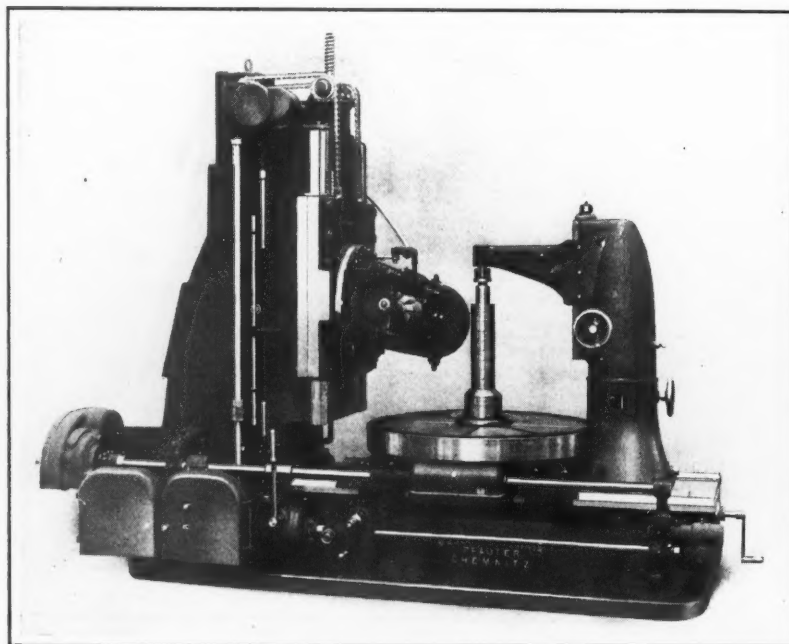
Pfauter Automatic Gear-hobbing Machine
